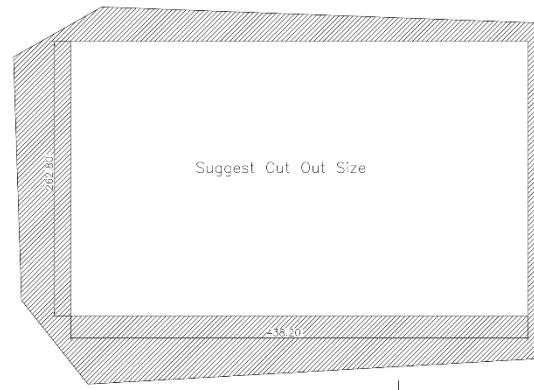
DM2-W185K(L) Cutout Dimensions (Unit: mm)
